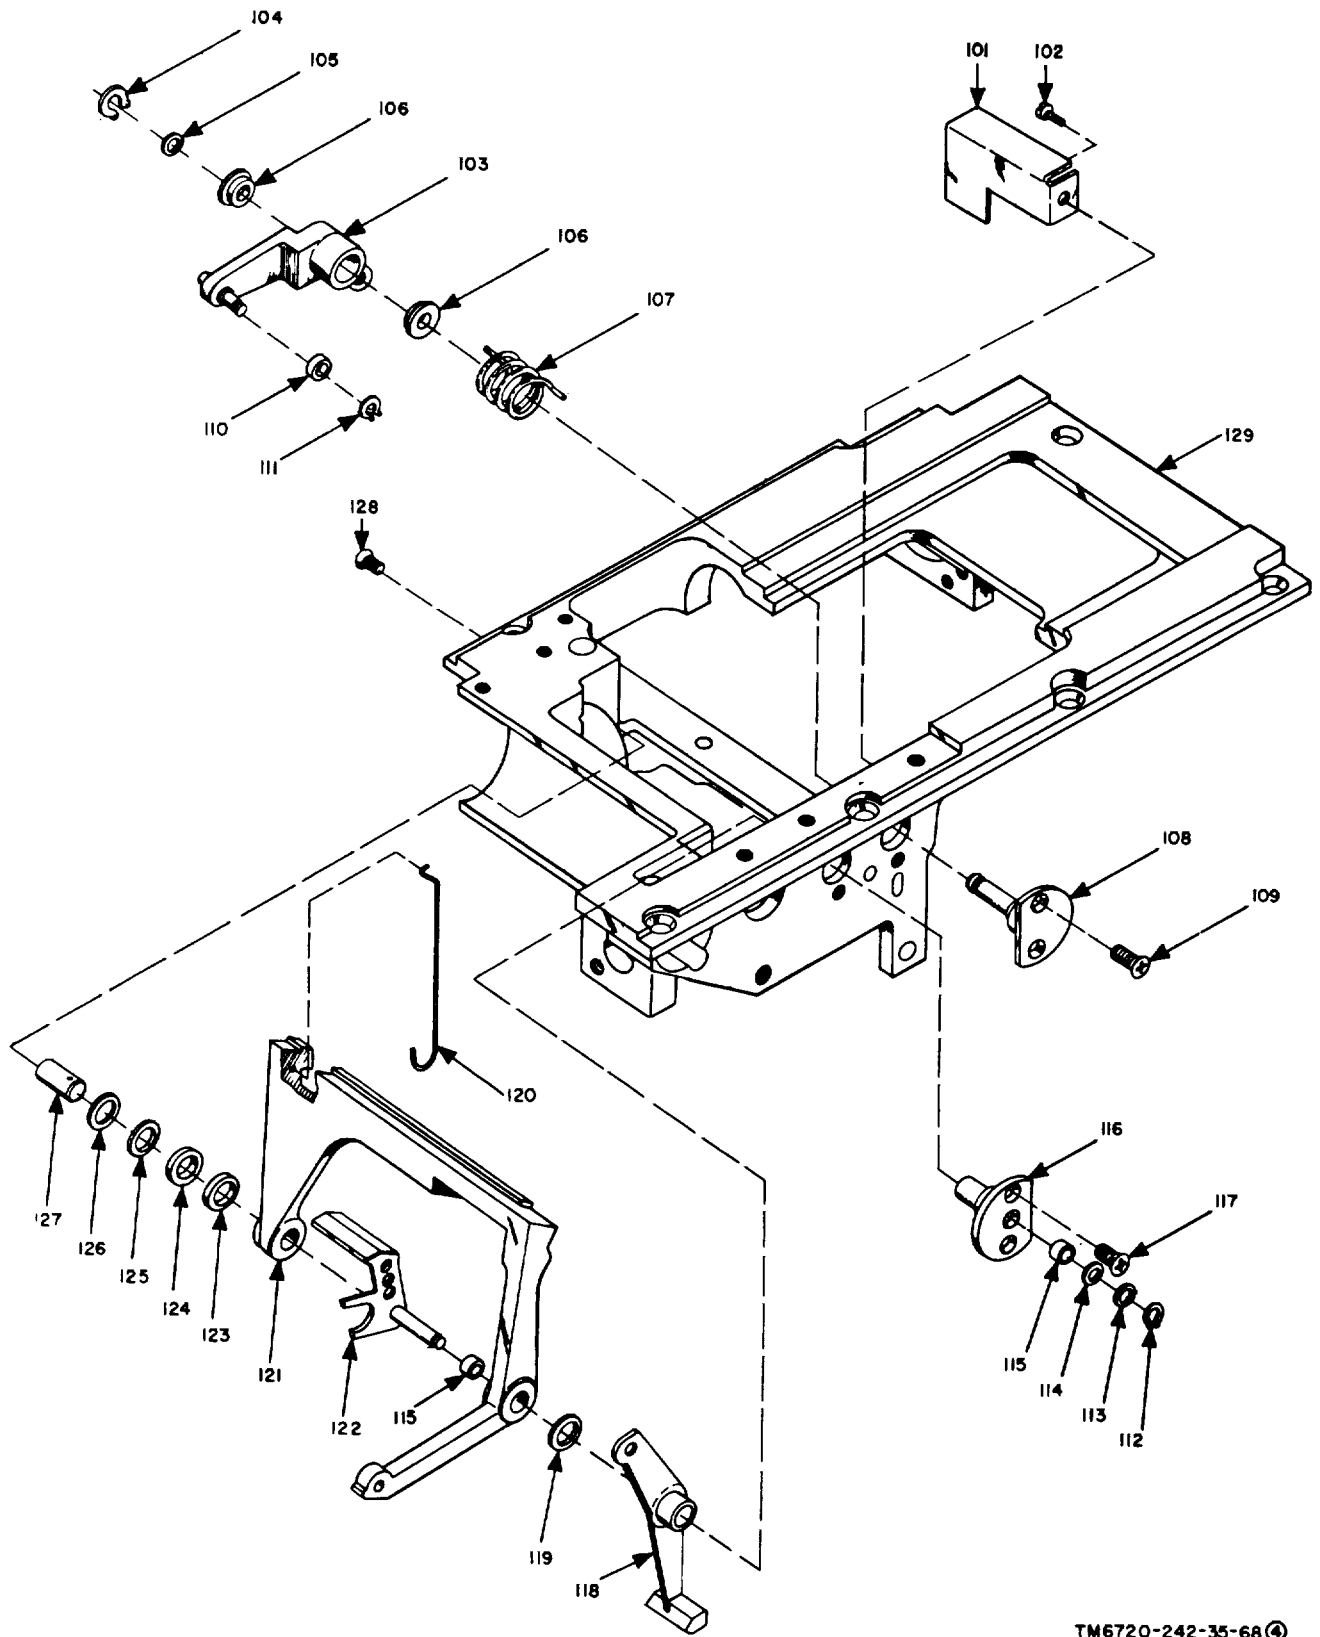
Aec assembly, exploded view (part 4 of 4)
